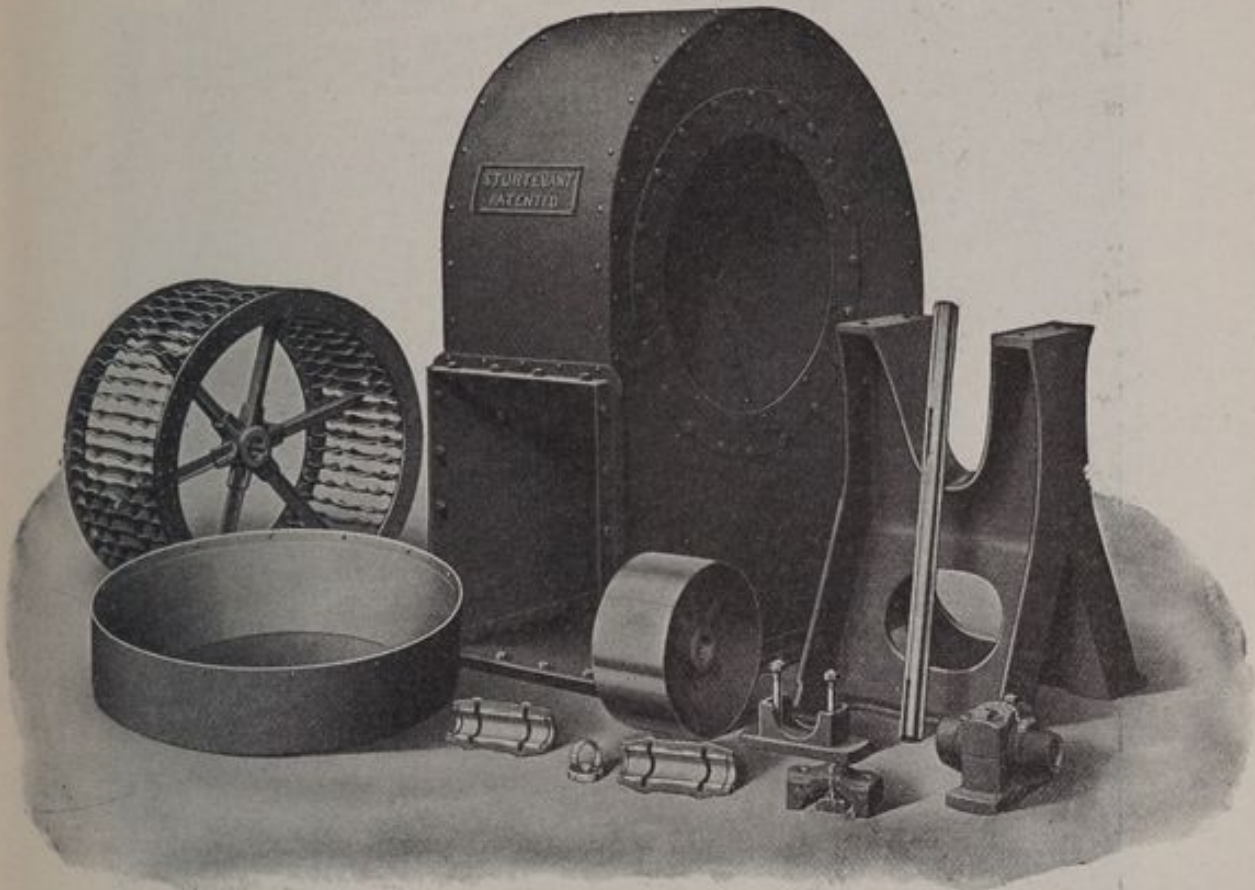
Sturtevant Multivane Fan. Details of Casing, Runner, Pedestal, and Bearings.
